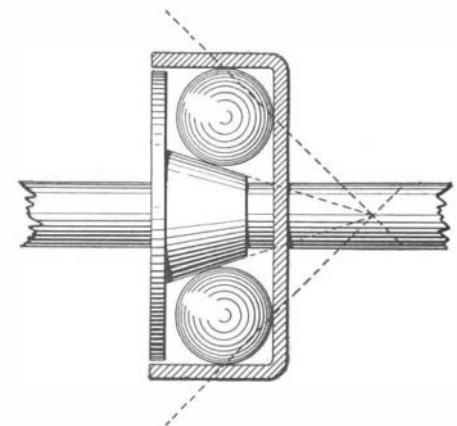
SECTION THROUGH 6-BALL BEARING, SHOWING METHOD OF MEASURING ANGLE OF CONE.
